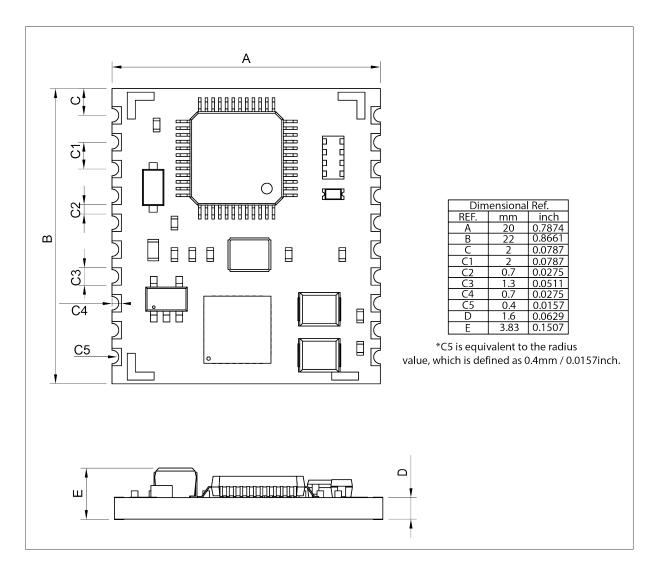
SM5211-SMD Mechanical Drawing without Shield (SMD20 Package)
